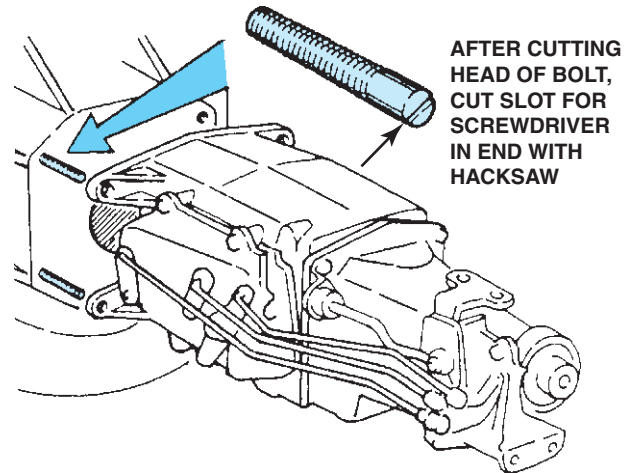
Headless long bolts can be used to help install a transmission to the engine.
